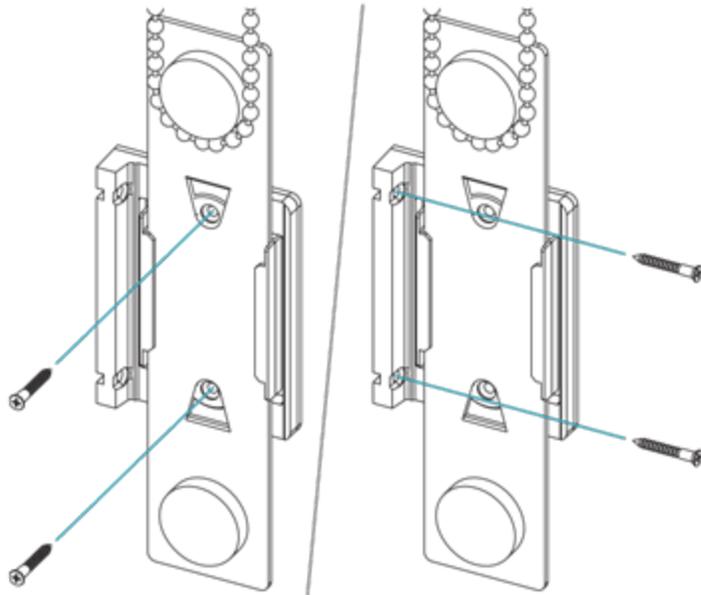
Inside Mount Position (left), Outside Mount Position (right)
